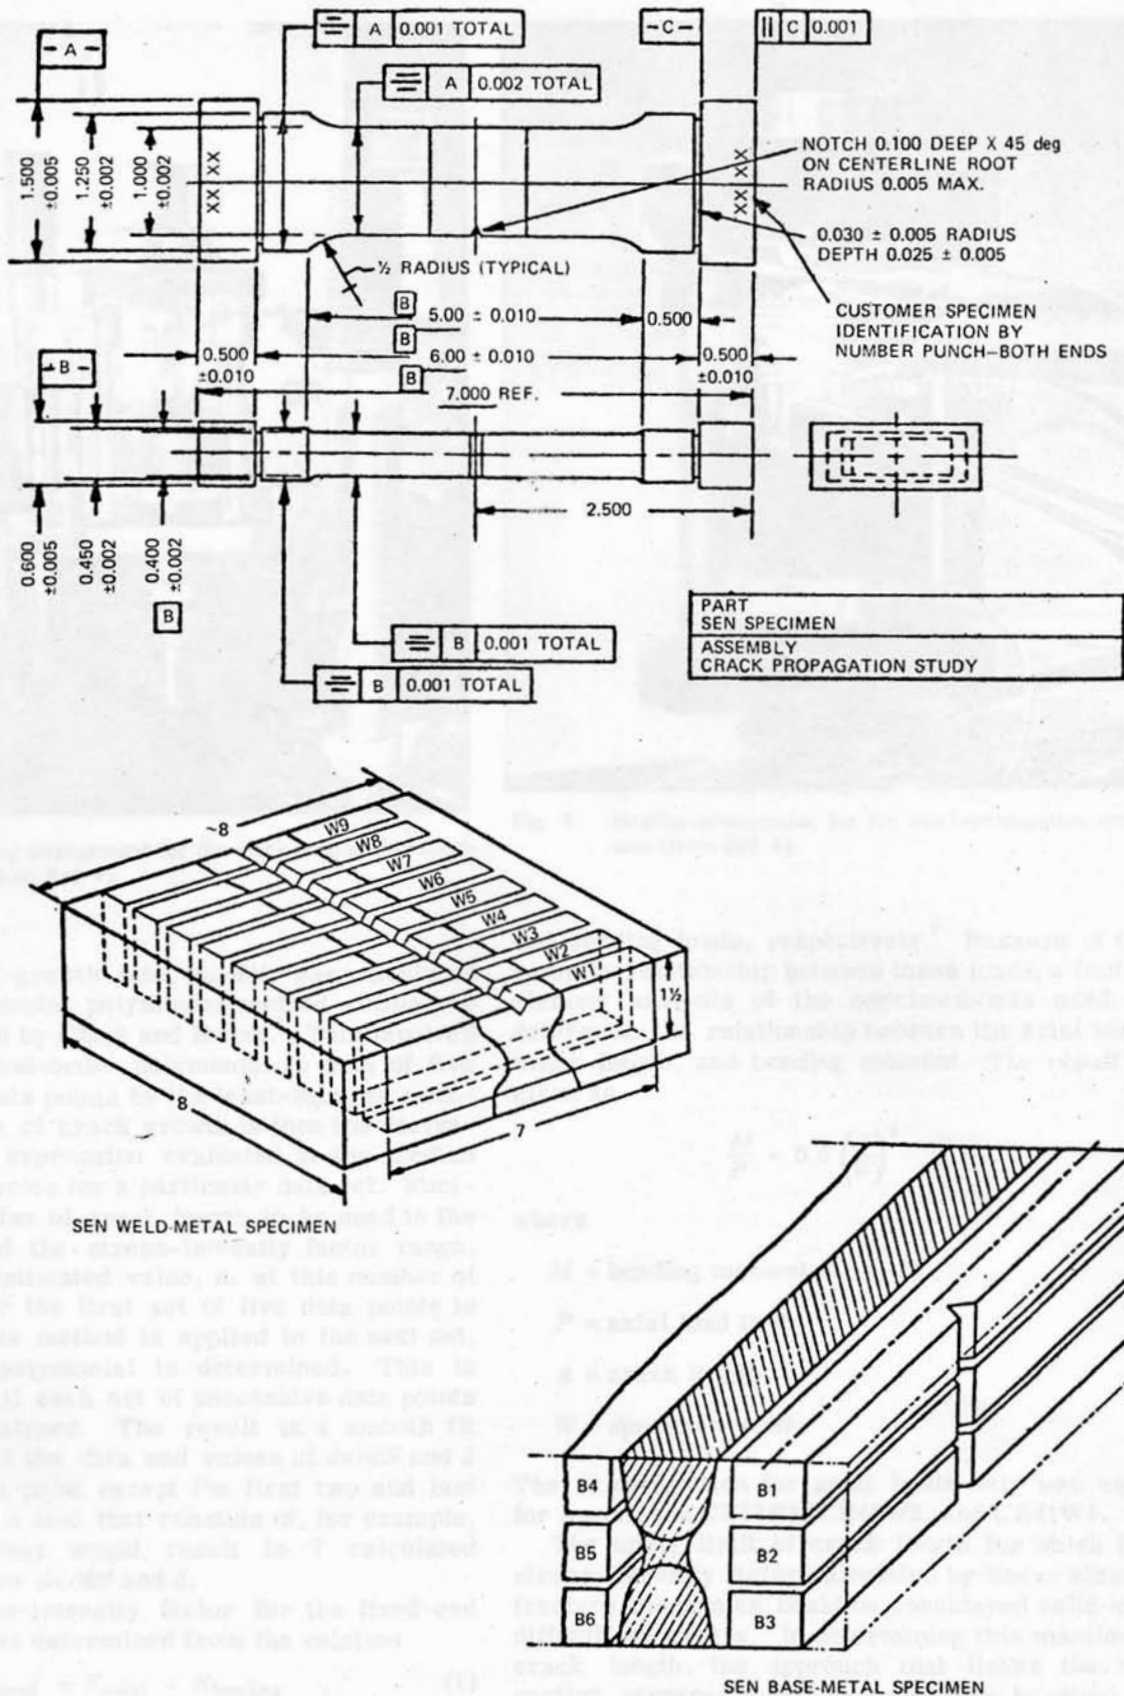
Single-edge-notch (SEN) weld- and base-metal specimens.
